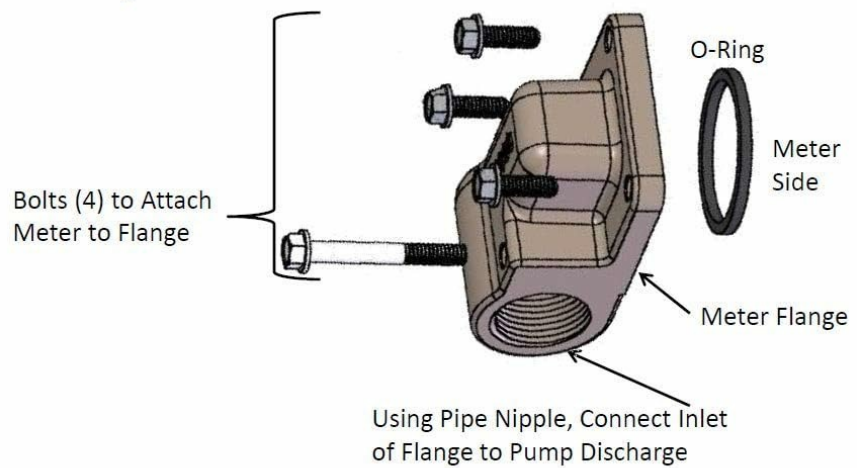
Exploded view diagram illustrating the assembly of the KIT120FLG meter flange, O-ring, and bolts for connection to a meter and pump discharge.
